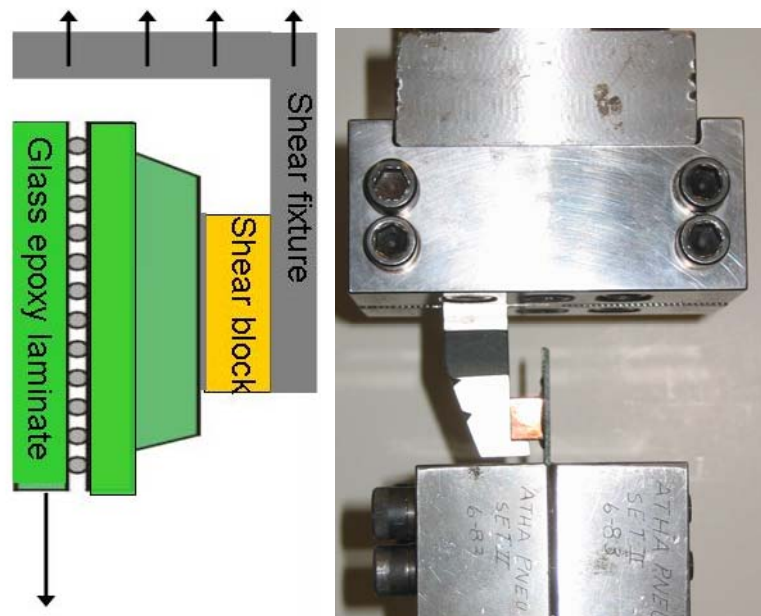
Test fixtures for mode II loading in fatigue and monotonic shear tests (B. Fiedler, 2007)
